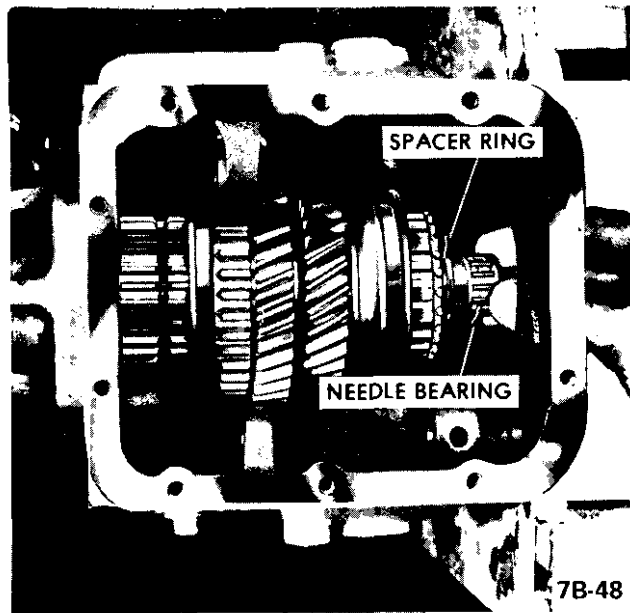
B-48 Installing Spacer Ring and Needle Bearing Onto Mainshaft
